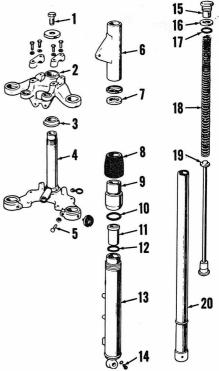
Exploded view of G4TR front suspension unit. Others are similar.
